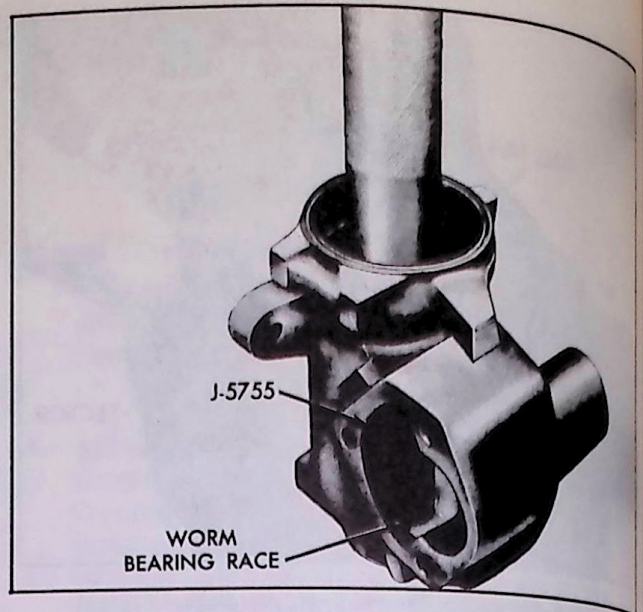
Installing Wormshaft Bearing Race in Housing Using Tool J-5755—Typical
